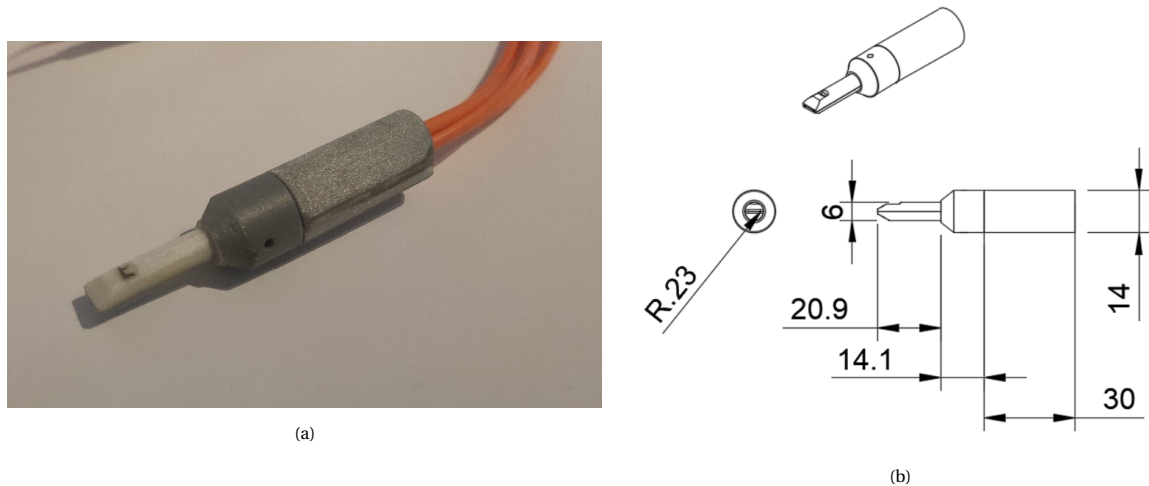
In (a), the assembled prototype is shown. The orange cables are the optical fibre tubing going into the prototype. In (b), the dimensions of the prototype are given (in mm).
